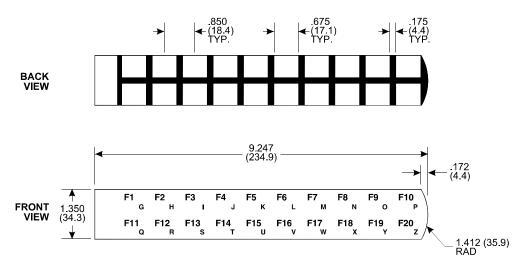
3410KP/3412KP F1-F20 Insert Dimensions
